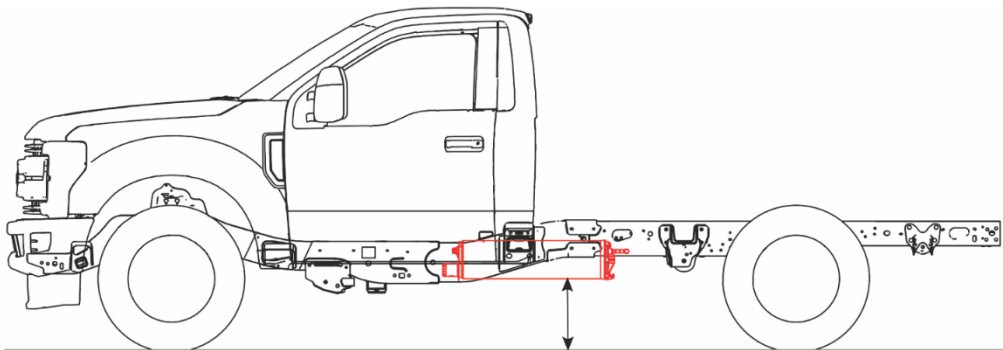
A700250 Relocated AOST, Driver's Side Inboard of Frame
